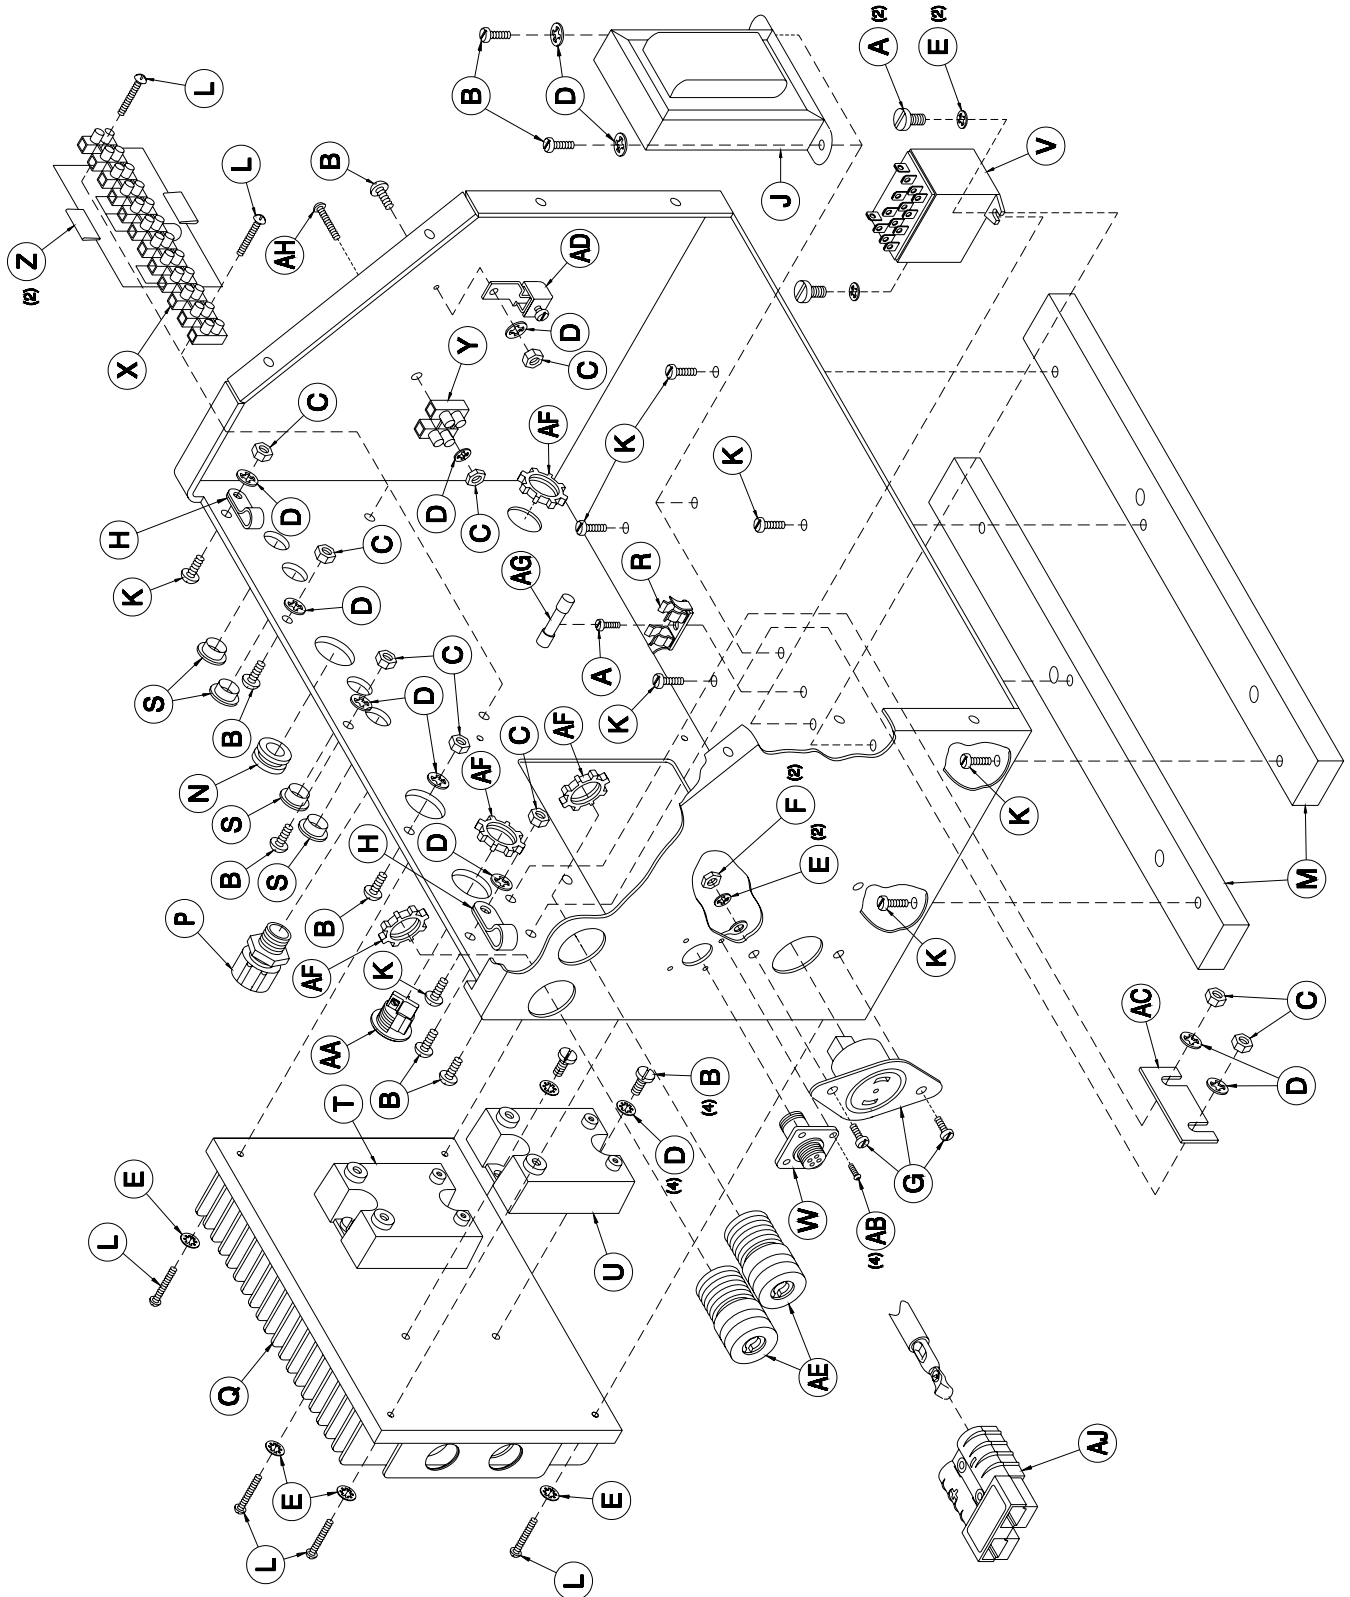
Electric Console (Part No. 25650-SIZE), Exploded View, Sheet 2 of 3
